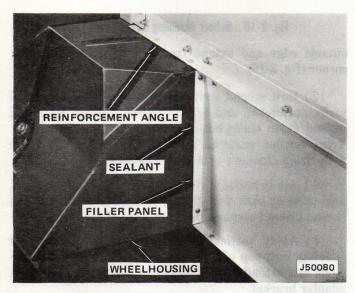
Filler Panel and Reinforcement Angle Installed
